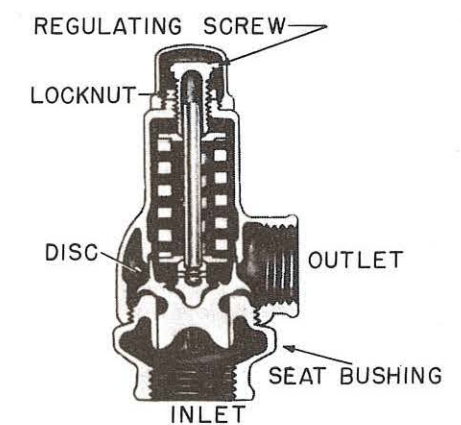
No. C-4050-DBB Water Relief Valve.
